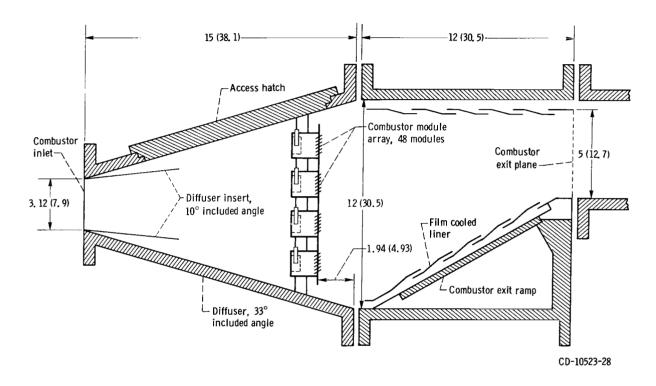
Combustor installation in test section. (Dimensions are in inches (cm).)
